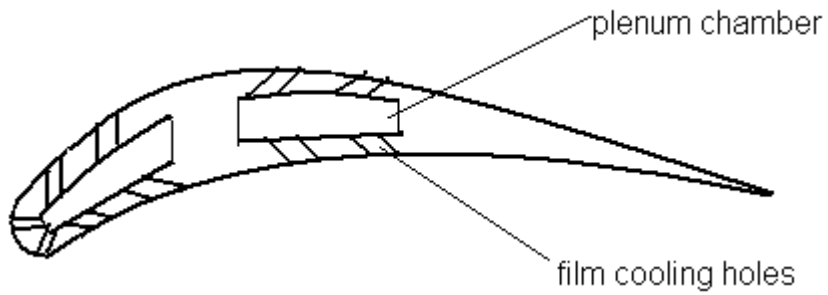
Cooling schemes for Inlet Guide Vane. [22]
